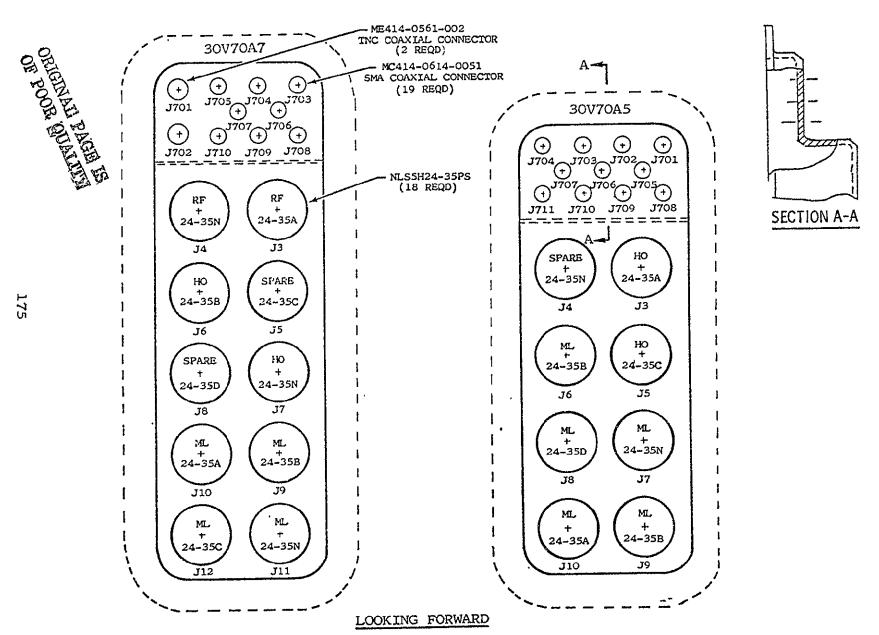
X_O 576 PAYLOAD SERVICE PANEL ASSEMBLY
